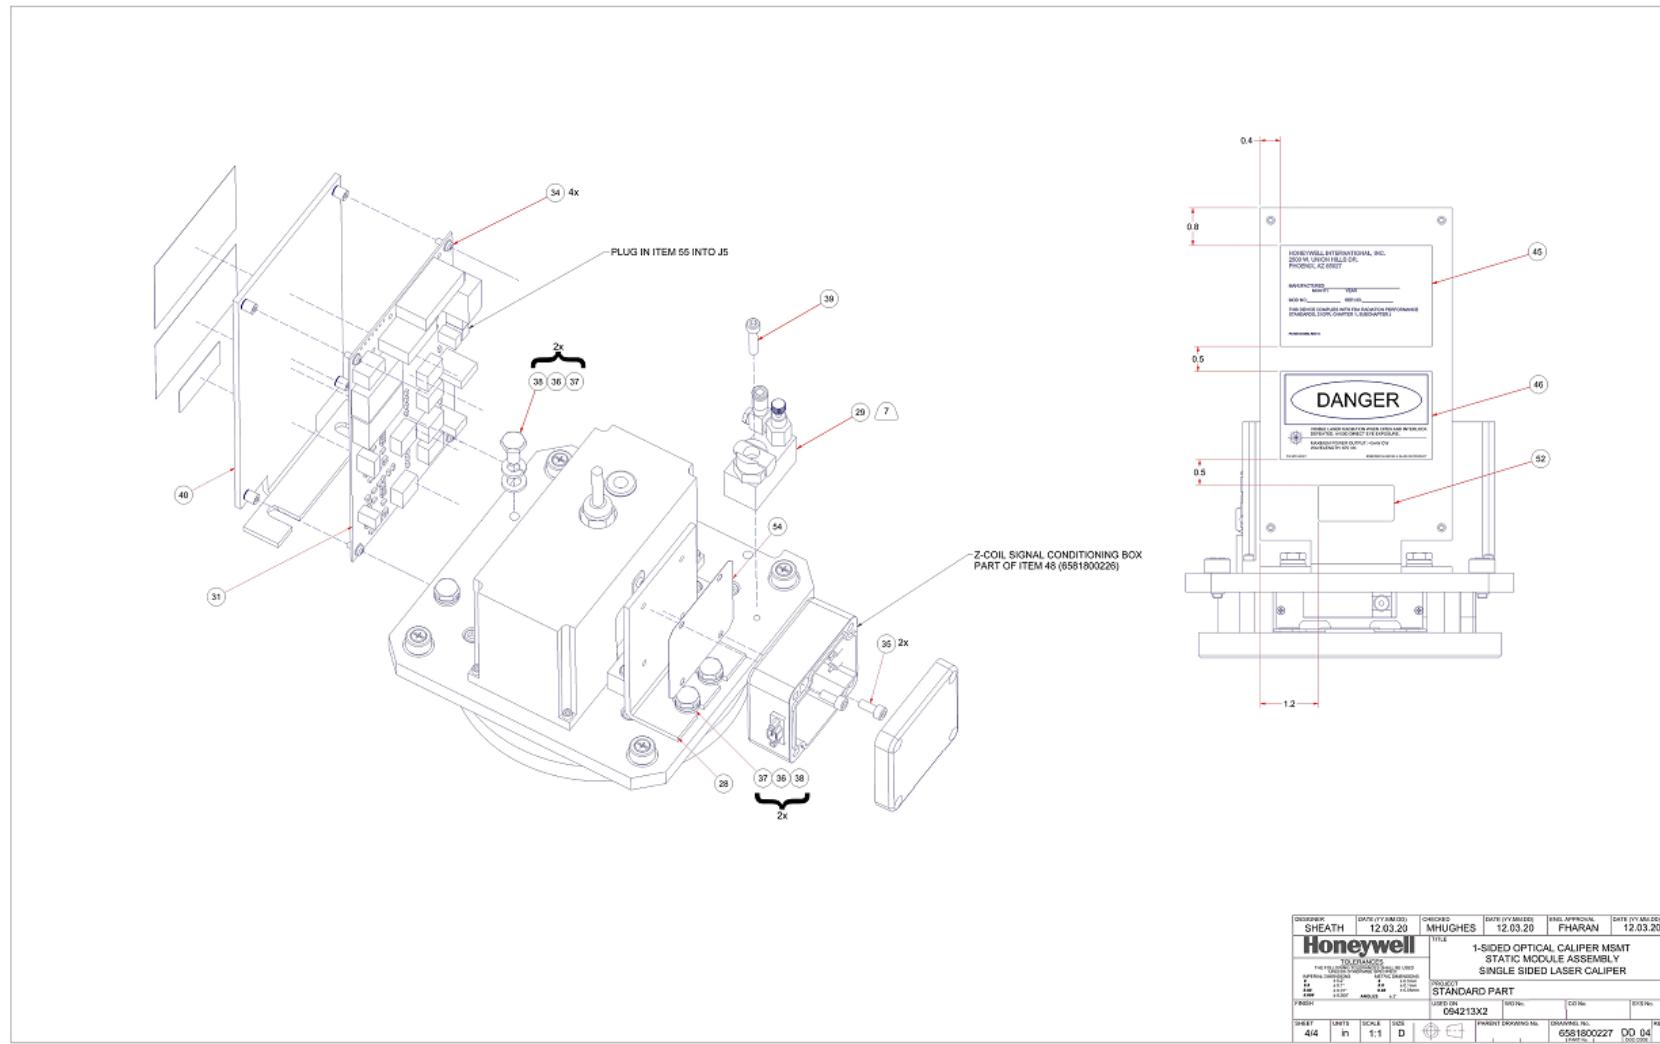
Laser Caliper STA-module Assembly (4 of 4)
